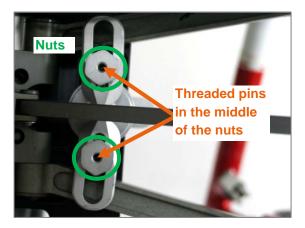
Rear view of folding mechanism with closed locking sliders, nuts to adjust the tension of the clamp levers
